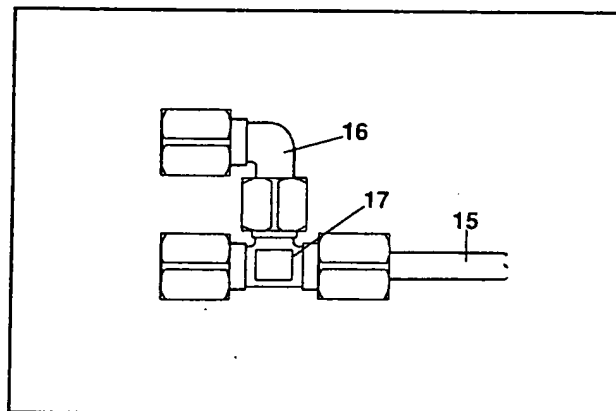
BEARING AIR INTERLOCK SUB-ASSEMBLY (shipped loose)
